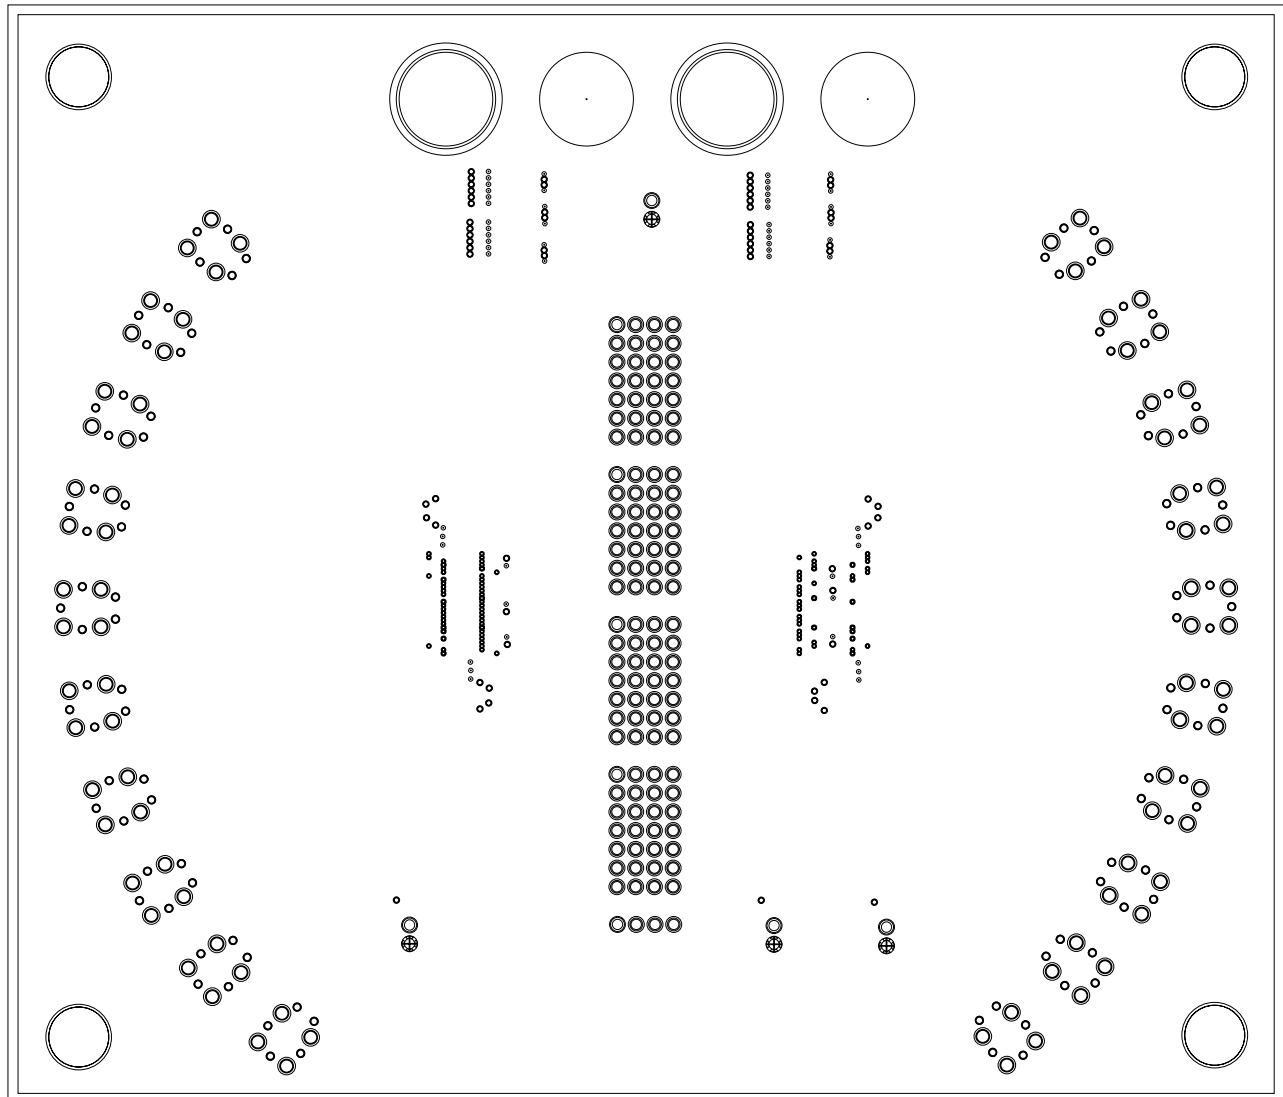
SNxxLVDS82-83-93-94 Board Layout: Top (Layer 1)
